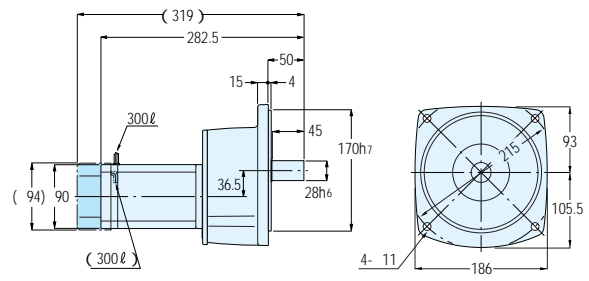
GILM-40-4 ~ 12/16 ~ 24-T50
